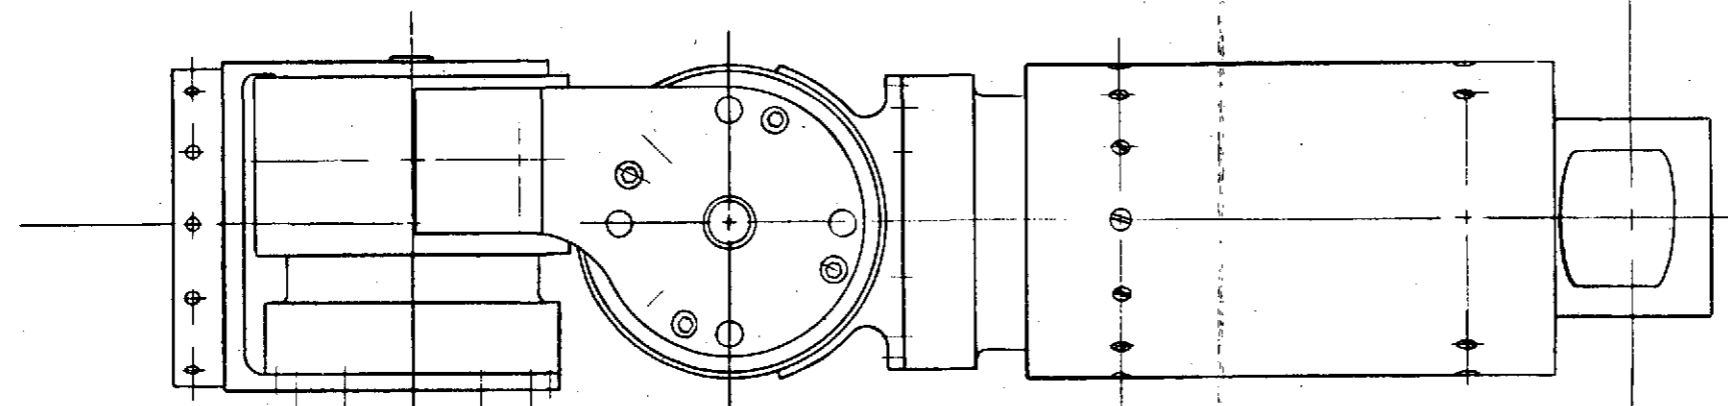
Final Assembly Drawing of FFIS Manipulator Arm
